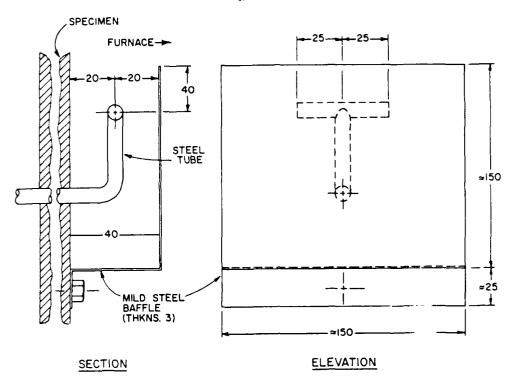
Static Pressure-Measuring Device Dimensions in Millimetres
